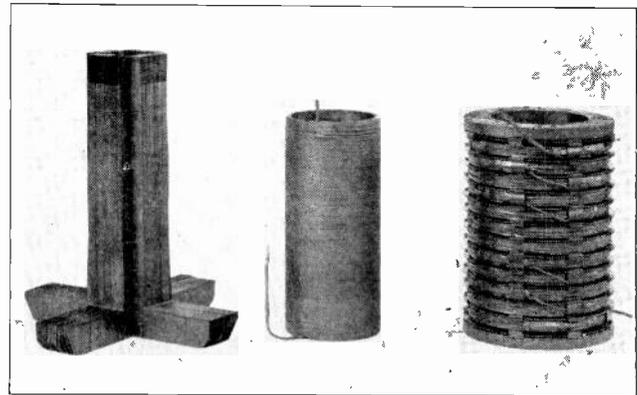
This view shows a partly assembled core of the distributed type and the primary and secondary windings which are ready to be placed on the core. (Photo courtesy General Electric Co.)
